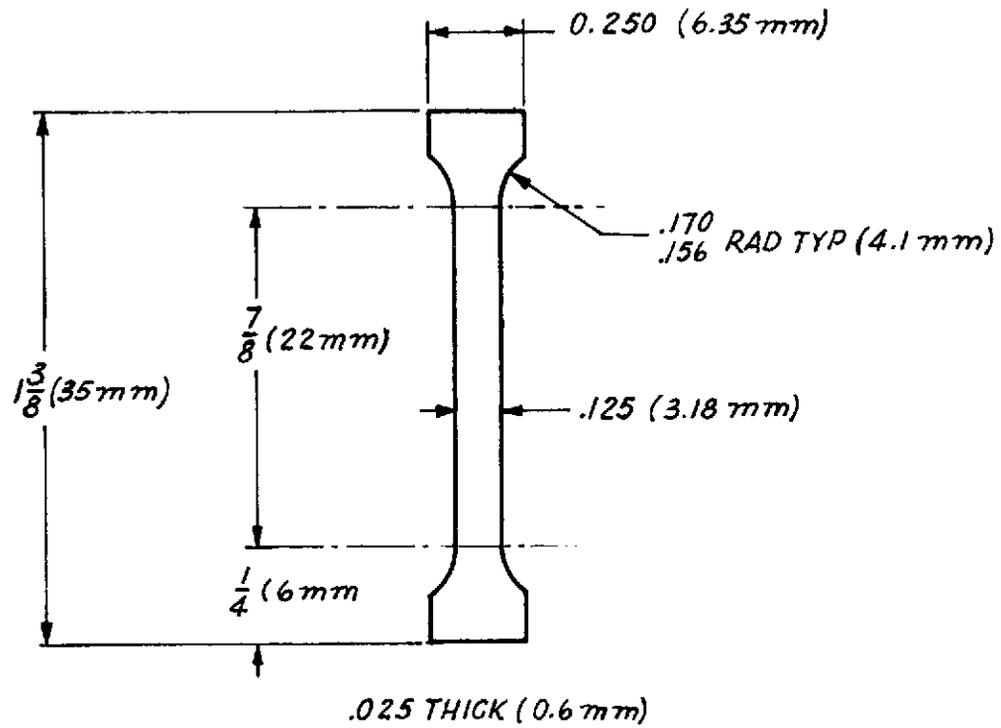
Sheet-type specimen used for tensile measurements on sputter-deposited material. Nominal 0.6 mm thickness. Dimensions in inches and millimeters.
